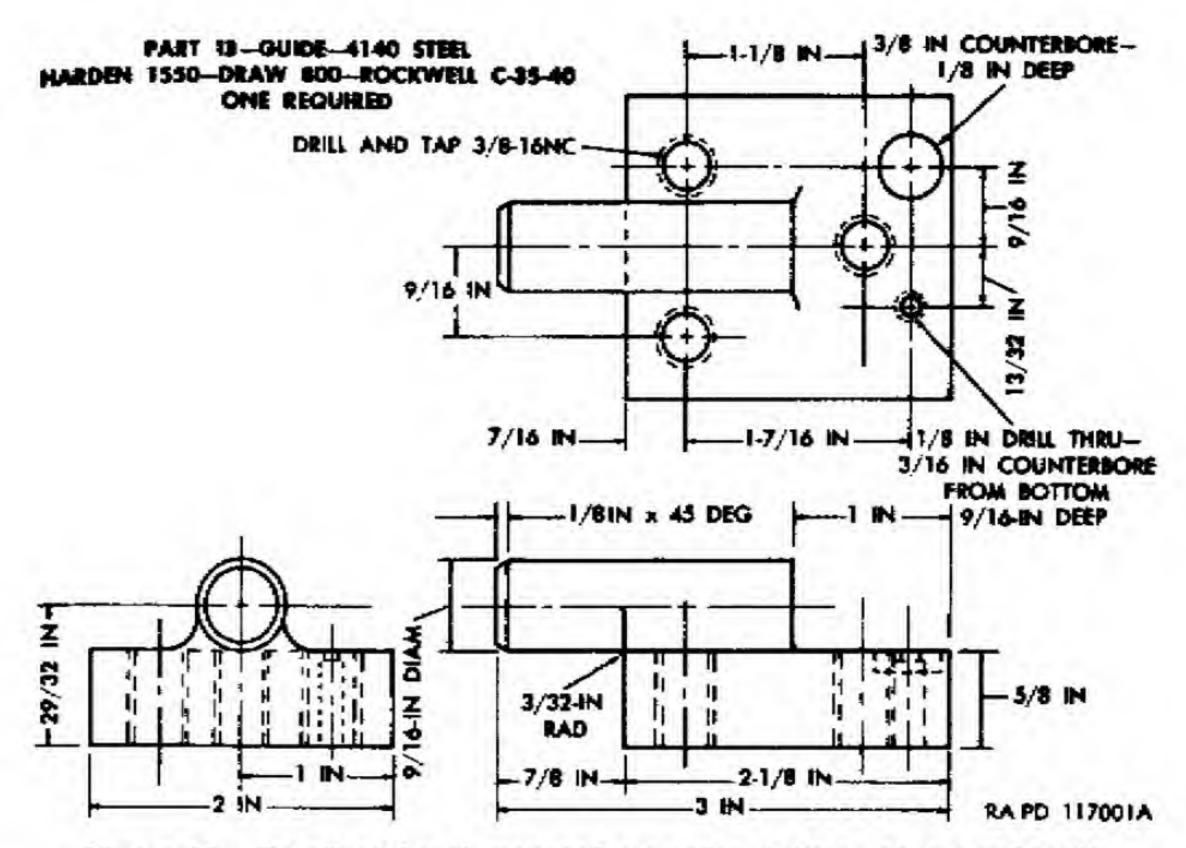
Detail of bench-mounted stamping flature—part number 18.
